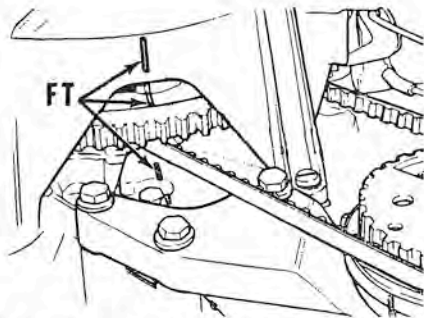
Engine timing marks are located on starter housing, flywheel and engine block as shown at (FT).
